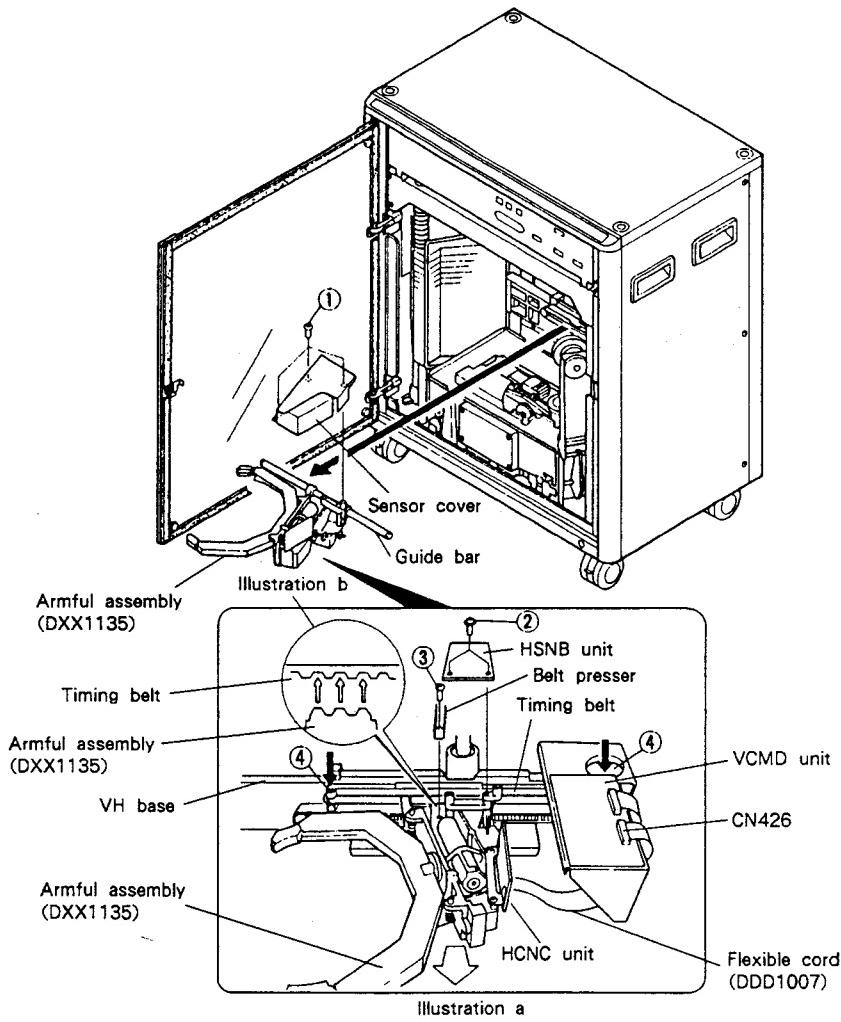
Replacement of the armful assembly (DXX1135)
